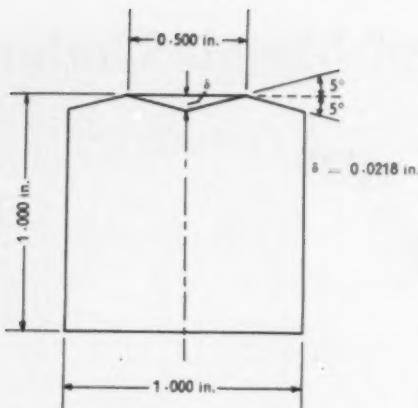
Nominal dimensions of coned steel specimens. (Diametrical section through specimen).
